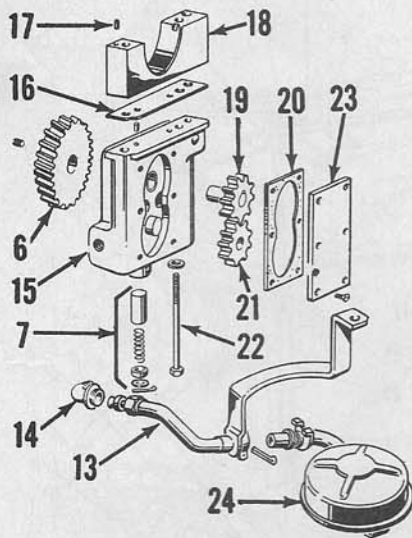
Model TO30 engine oil pump which is bolted to the lower side of the No. 1 main bearing cap. TE20, and TO20 oil pumps are similar in construction.
